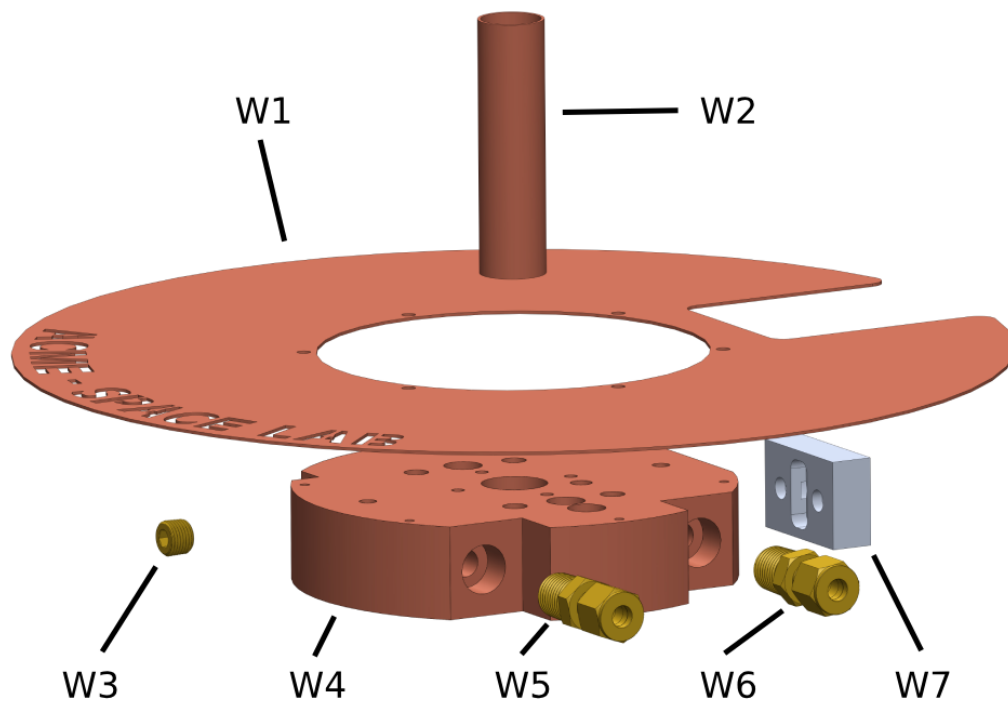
Numbered parts of the cooling block showing the separate inner and outer poles.
